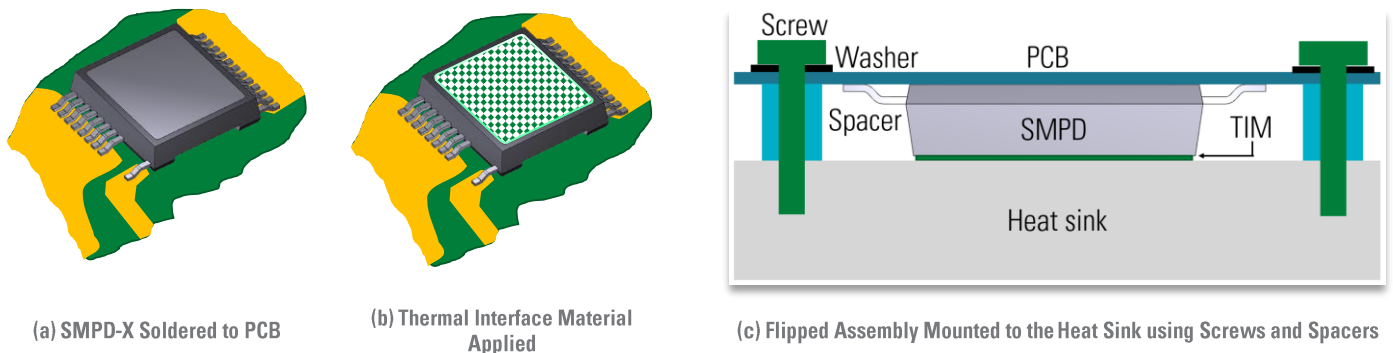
Sequence of Mounting the SMPD to a Heat Sink
